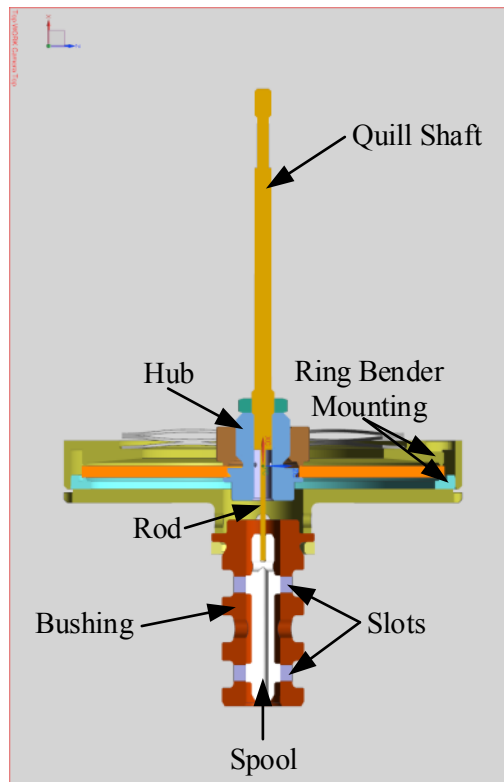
Cross section of first stage, showing the first stage spool, bushing, ring bender and the quill shaft.
